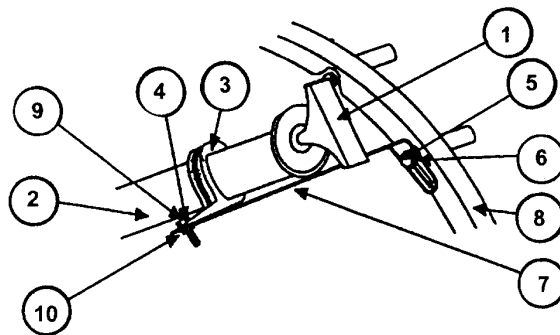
Oil Fill Tube Assembly and Oil Level Indicator (Dipstick). (Repeated).
